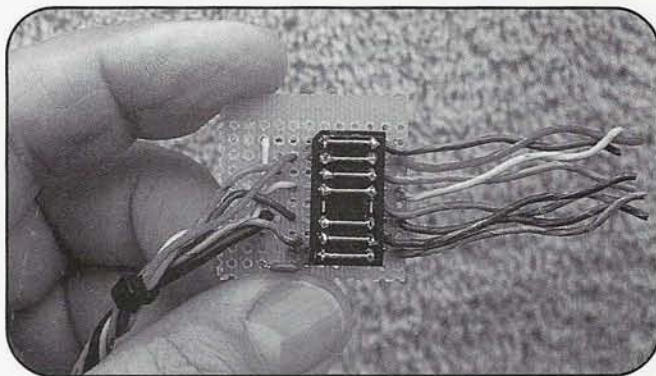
Close-up view of the H1 header with wires attached (see text for details).
